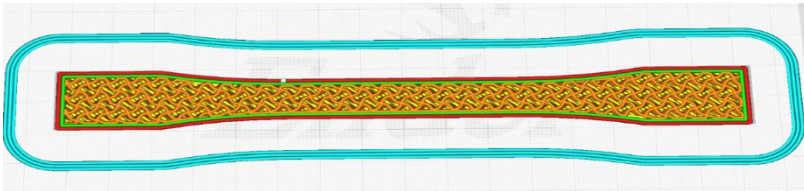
Layer view of the sample with 1 mm nozzle size and 50% infill
